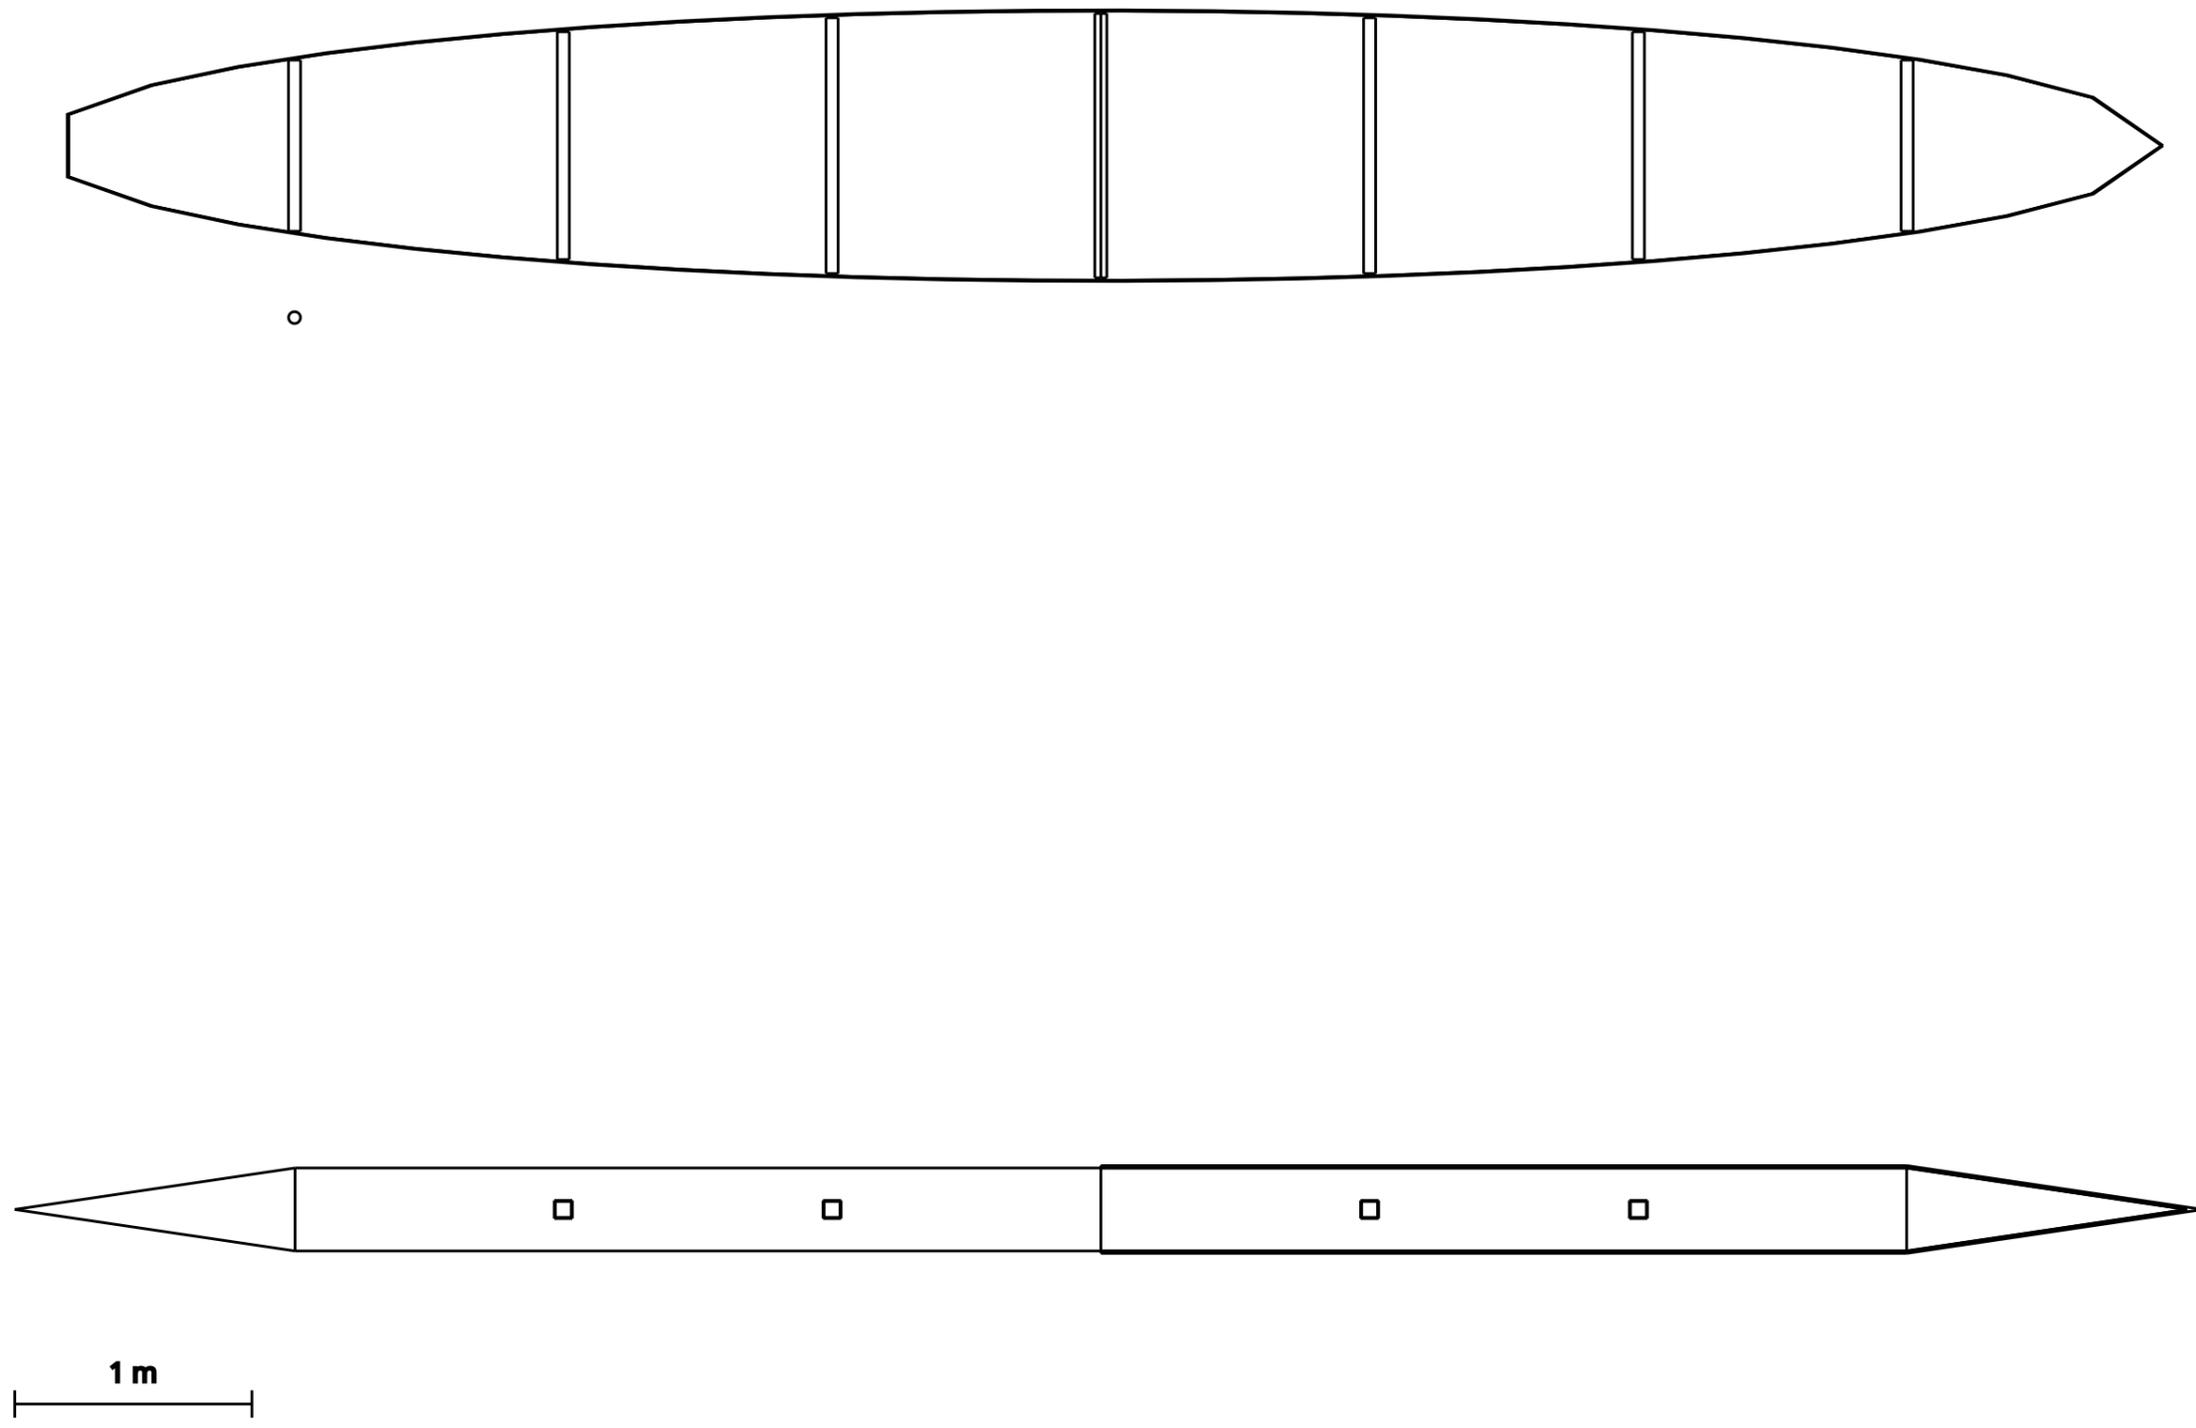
Horizontal Section—ama_centerline (Z=185mm)
